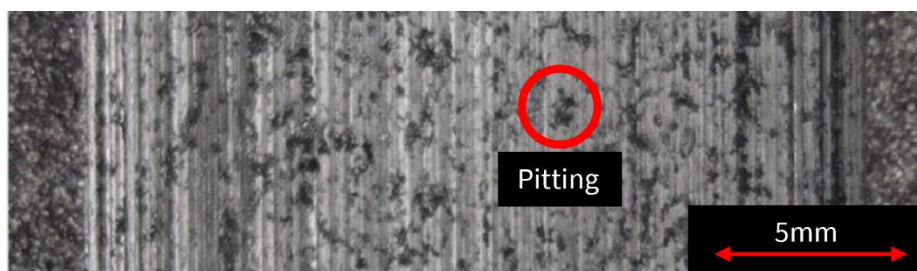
Section of M320 50.8HR15y rub track showing pitting after 0.02 μ m/pass test with a 100°C backplate
